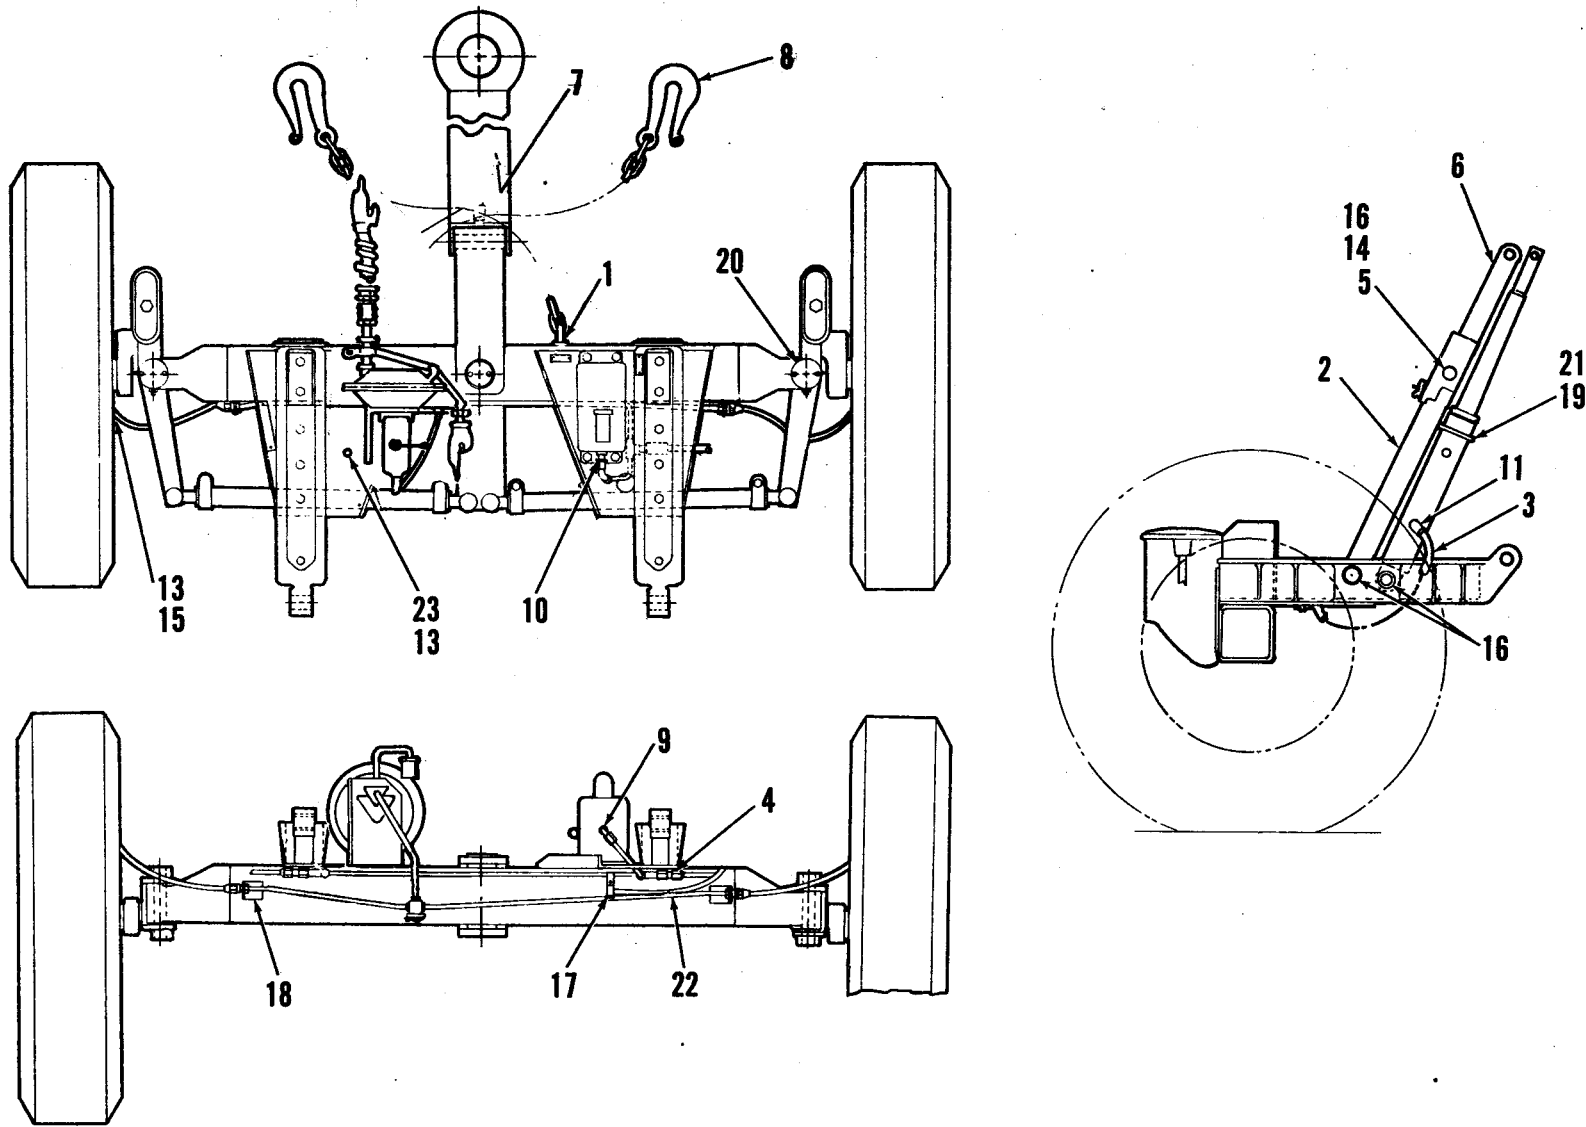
FRONT AXLE ASSEMBLY (SHEET 1 OF 2)
